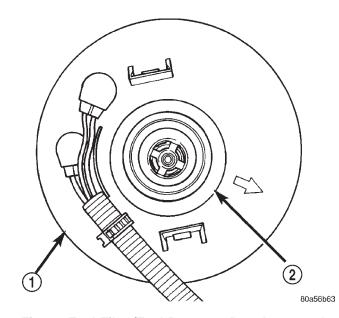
Fuel Filter/Fuel Pressure Regulator Gasket
